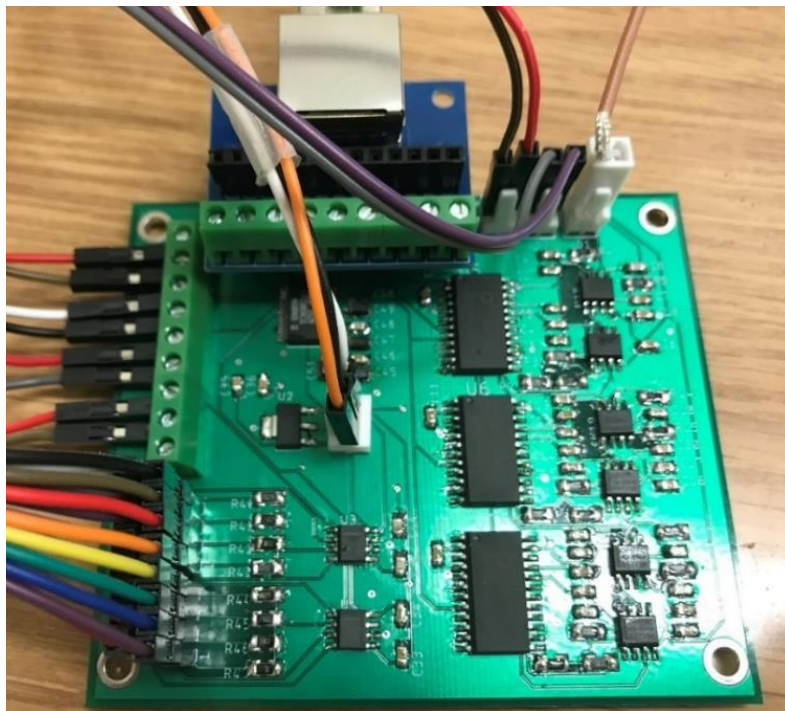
The PCB board of the prototyped 16-bit ADCs and DACs.
